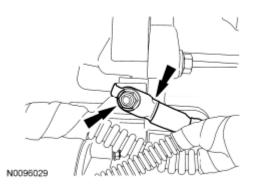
Locating Ground Wire And Starter Motor Stud Bolt
